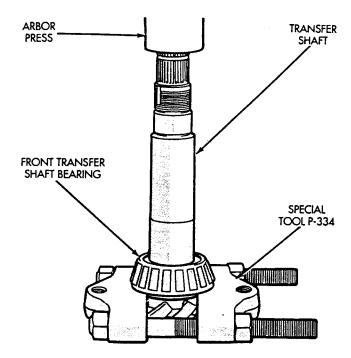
Remove Front Transfer Shaft Bearing And Pinion Depth Shim
